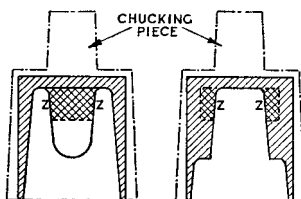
I.c. engine piston pattern, which avoids the need for coring
